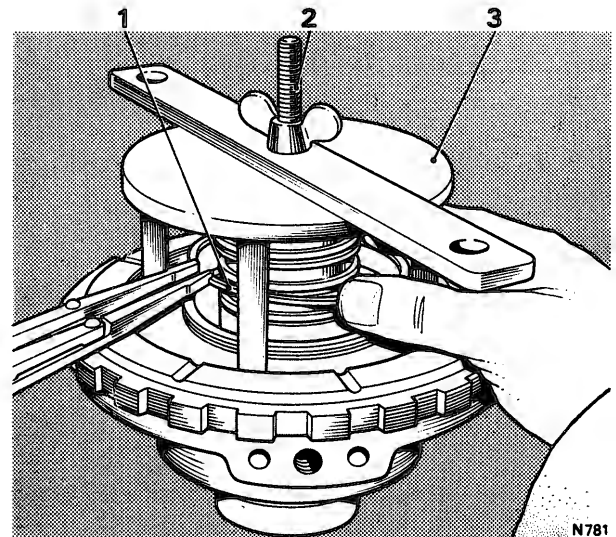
REMOVING AND FITTING THE INTERMEDIATE CLUTCH PISTON SNAP RING
